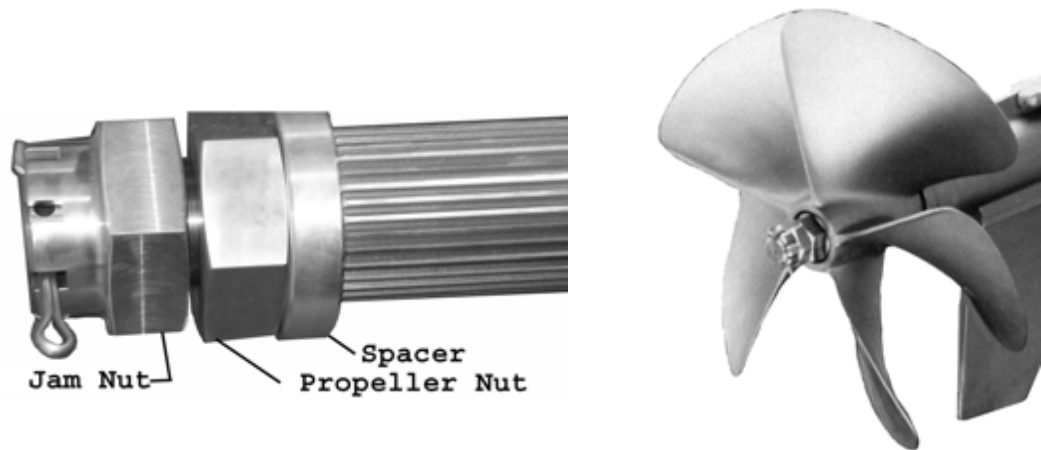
Propeller Retaining Parts (left), and Propeller Installed (right)
